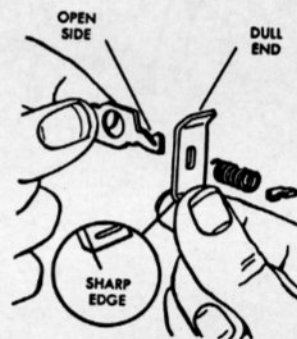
If Fairbanks-Morse starter friction shoe assembly is disassembled, be sure to reassemble as shown.
